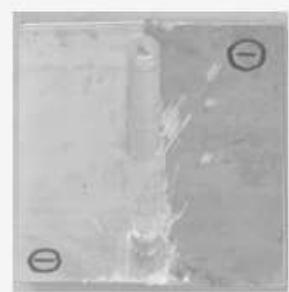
Welded plate using the rotational speed of 750 rpm
